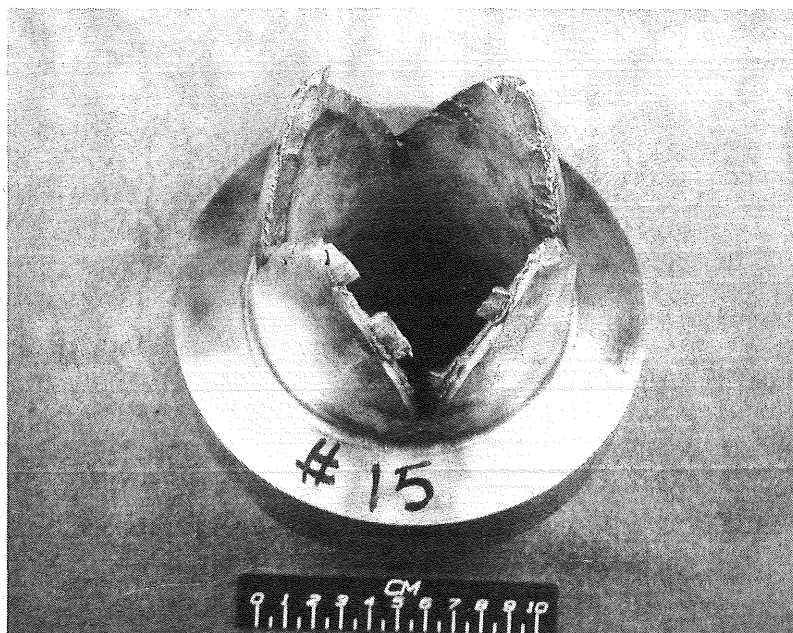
Posttest photo of worst case ragged edge, shaped diaphragm, Test No. 15, 6,160 bars.
